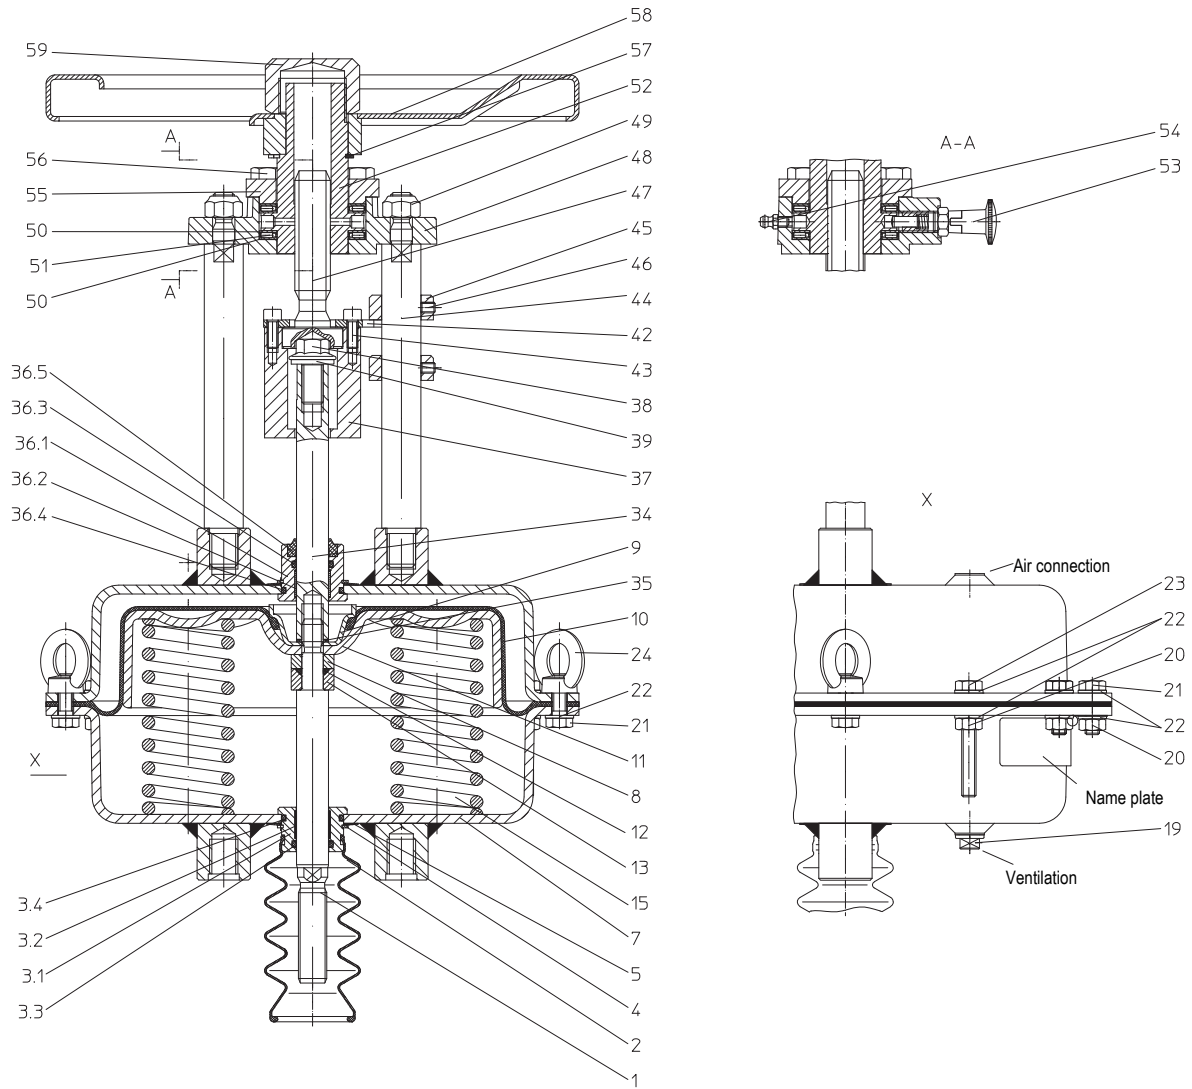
DP33 with manual emergency adjustment „actuator stem retracts by spring force“
